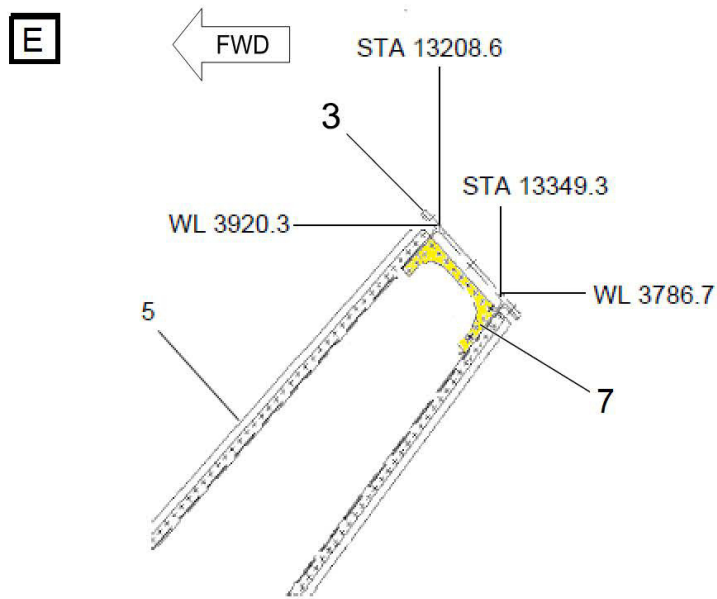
Tail section - Tail gearbox attachment structure - Detailed inspection (Sheet 5 of 5)
